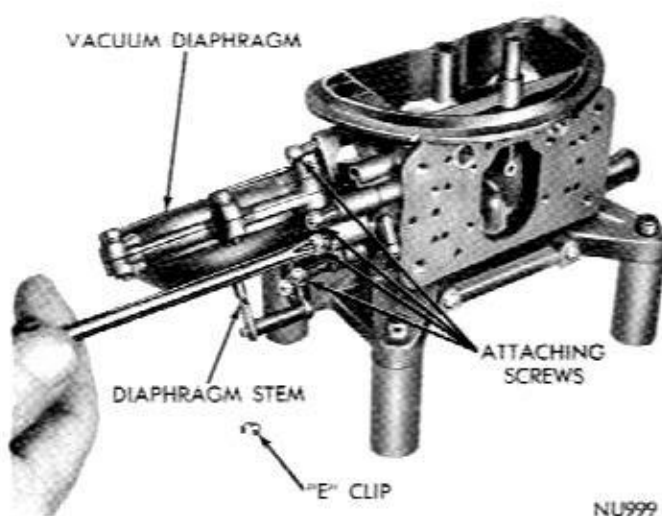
Removing or Installing Diaphragm Mounting Screws
